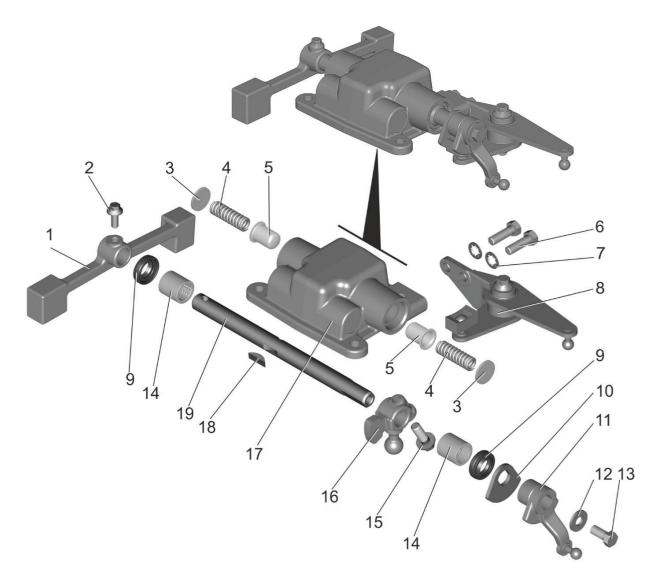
Control linkage cover assembly: 1 - counterweight; 2, 6, 13, 15 - bolts; 3 - plugs; 4 - safety-lock springs; 5 - engagement safety-locks; 7, 10, 12 - washers; 8 - selection lever assembled with support; 9 - collar seals; 11 - engagement lever; 14 - linear motion ball bearings; 16 - gear-shift lever; 17 - control linkage cover; 18 - key; 19 - gear-shift shaft.
